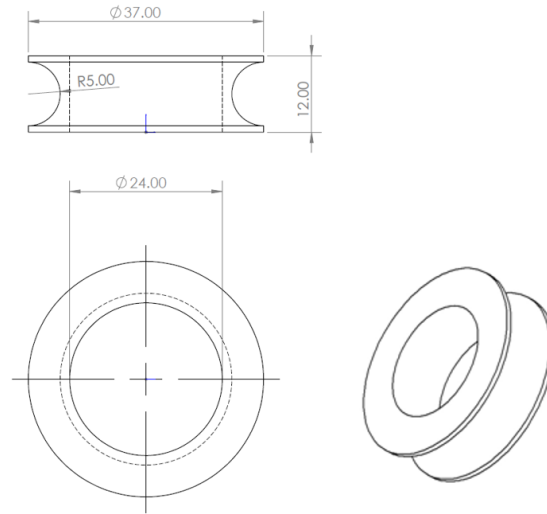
Ti64 notched compression ring specimen (dimensions in mm)
